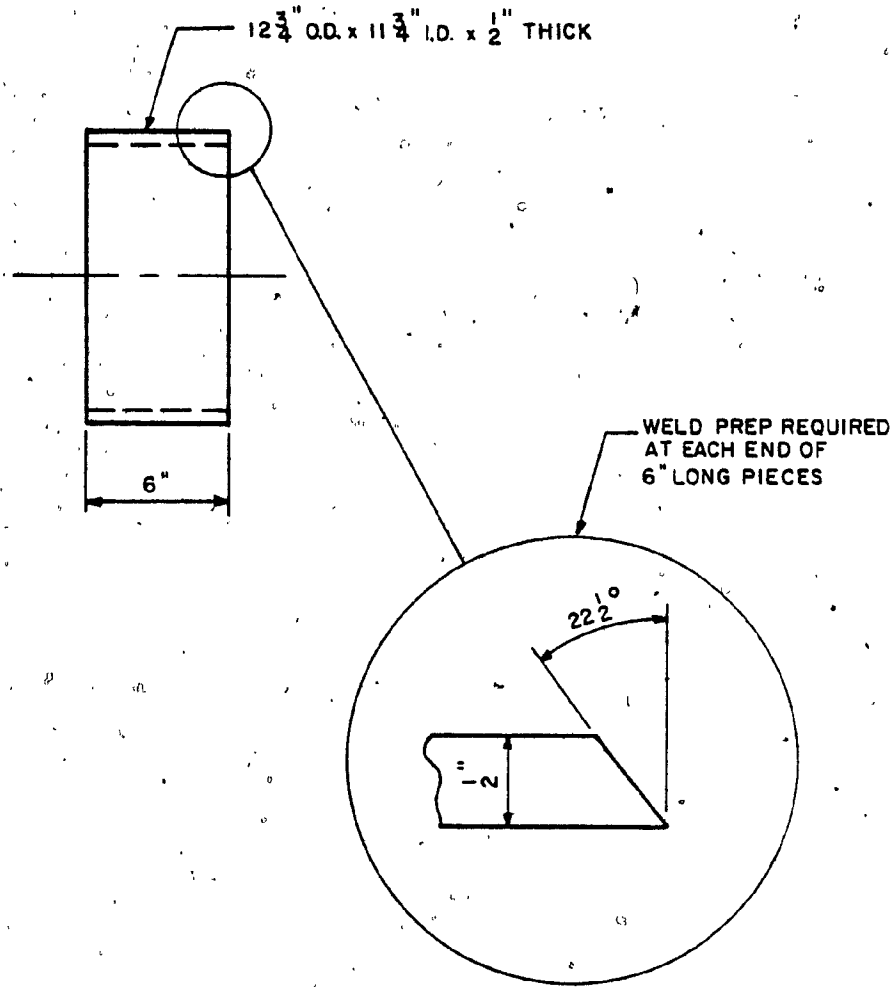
Preparation of Tubular Section, for Weld Test
